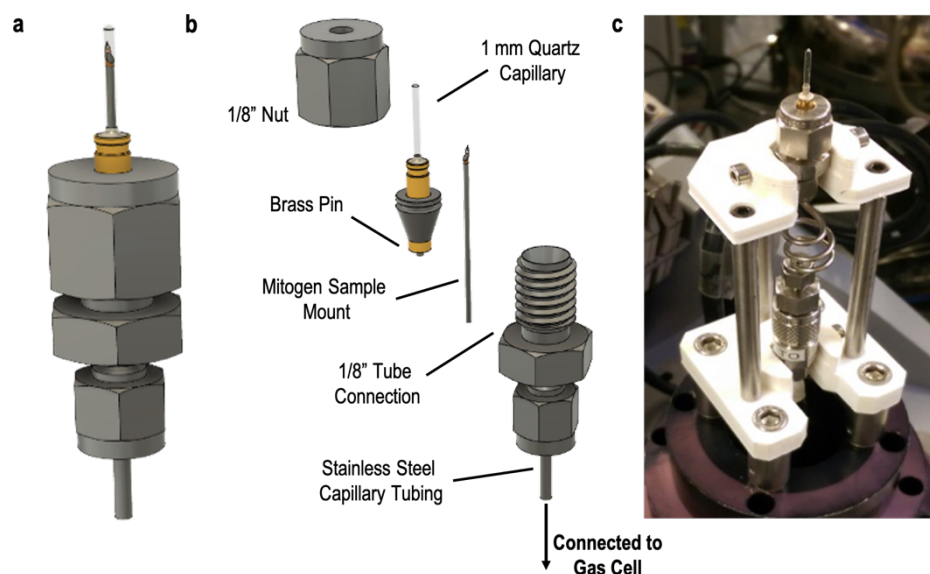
I19 Beamline 1mm quartz capillary gas cell equipment. a) Technical drawing of the head of the cell with b) showing the exploded view. c) Image of the diffractometer mounted cell. Image adapted with kind permission from Dr Mark Warren, Diamond Light Source.
